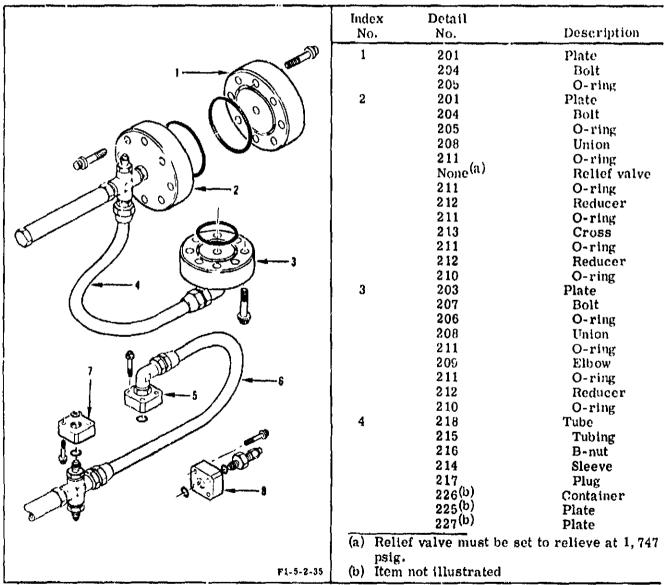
Pressure Test Fixture T-5031167 (Sheet 1 of 2)
